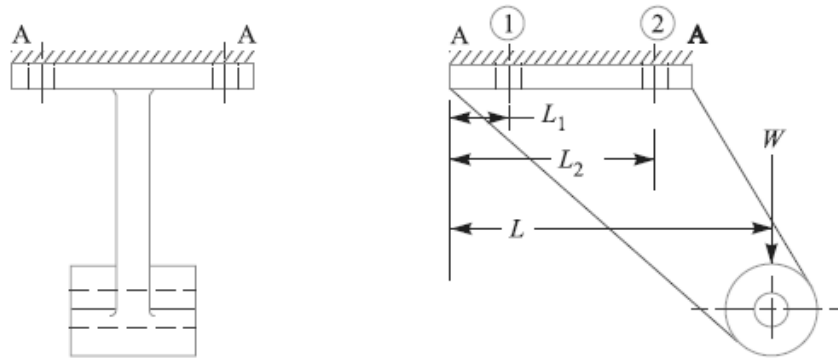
Eccentric load acting parallel to the axis of bolts.
